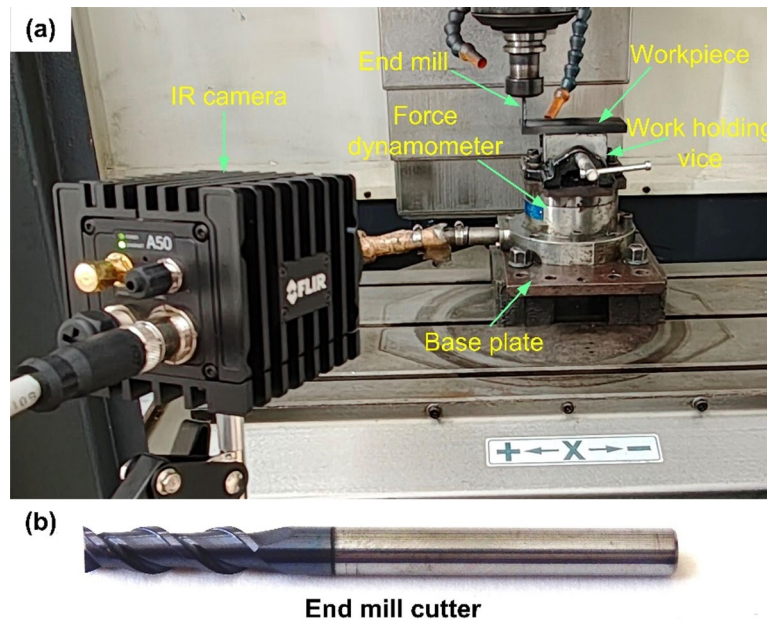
(a) Experimental setup with fixture, (b) Cutting tool employed in the machining experiments
